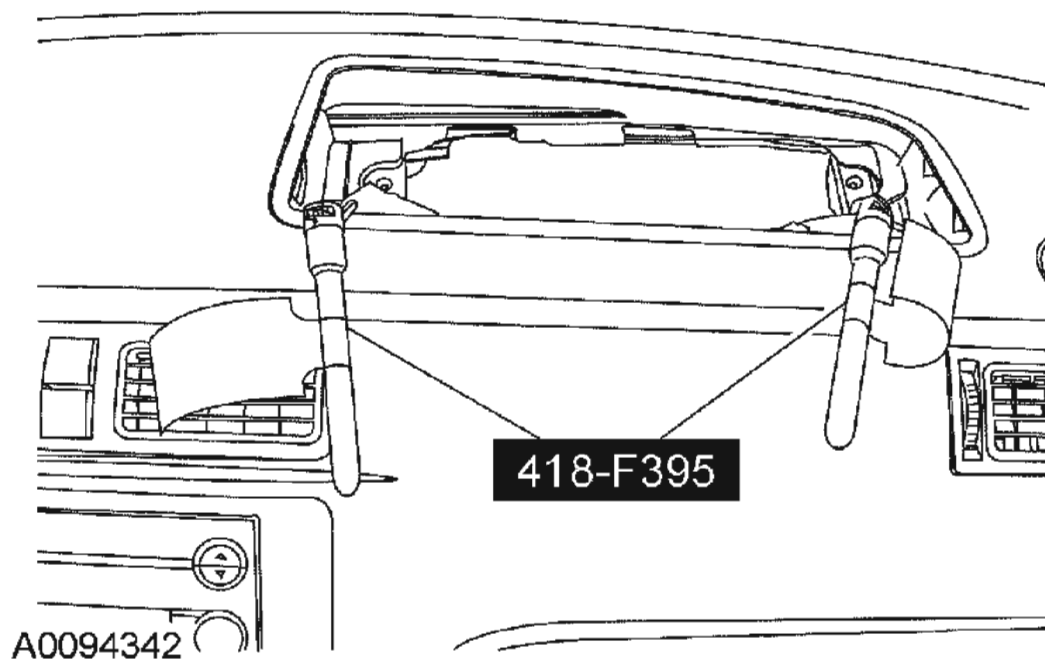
Removing Restraint System Diagnostic Tools From Vehicle Harness Side Of Passenger Air Bag Module Electrical Connectors
